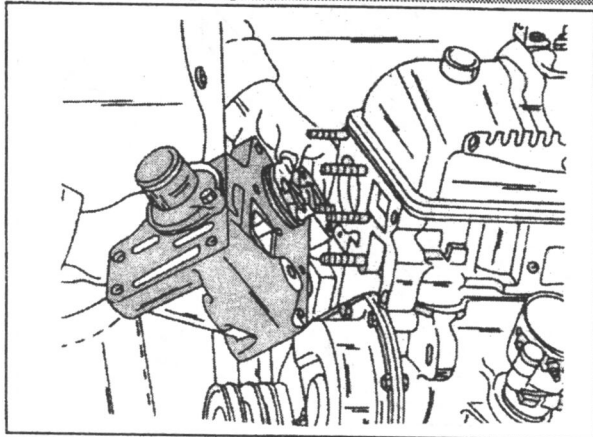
The water pump must be removed or installed at the angle shown.
